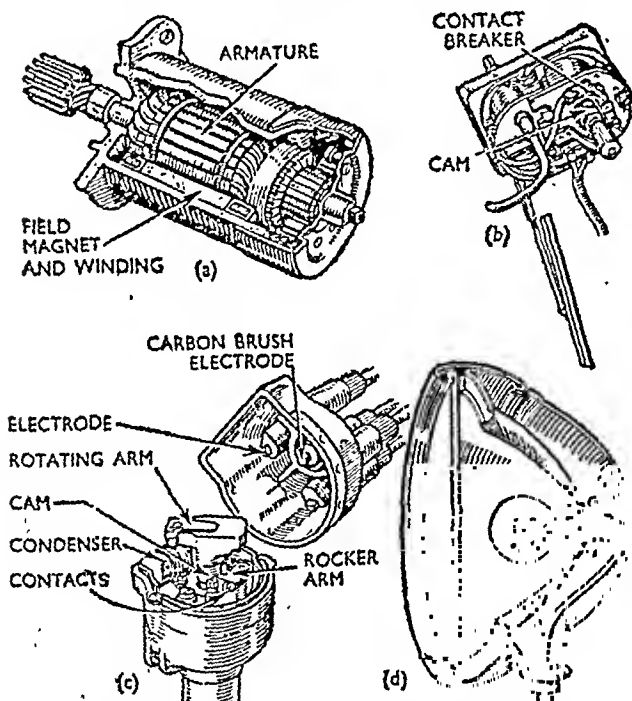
(a) Sectional view of a motor-car starter motor. (b) Electric windscreen wiper. (c) The distributor which conveys the high-tension current to each sparking plug in turn. (d) Motor-car headlamp.
